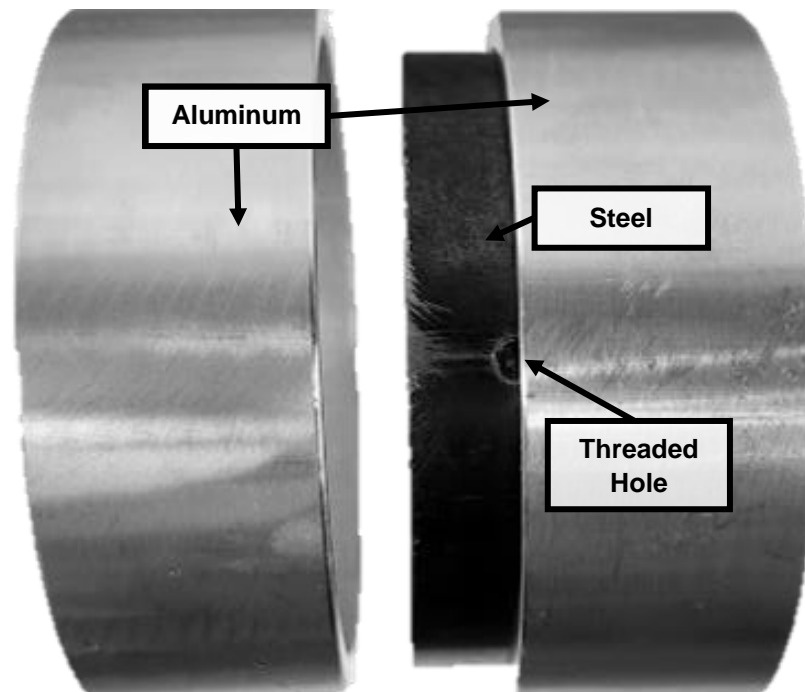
Workpiece assembly. The internal steel ring has four threaded holes on its circumference. Two aluminum rings slide over the steel concentrically and butt against each other.
